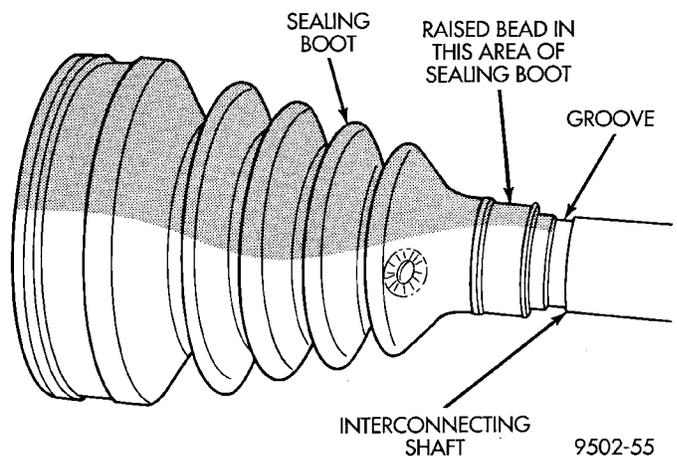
Sealing Boot Installation on Interconnecting Shaft
